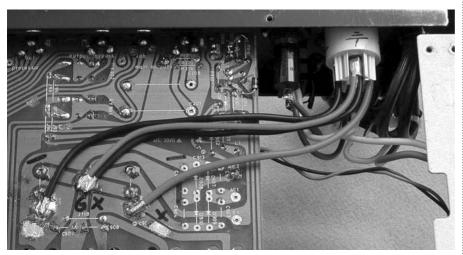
Inside the preamp, bottom view, showing the DC supply connections to the main PC board.
